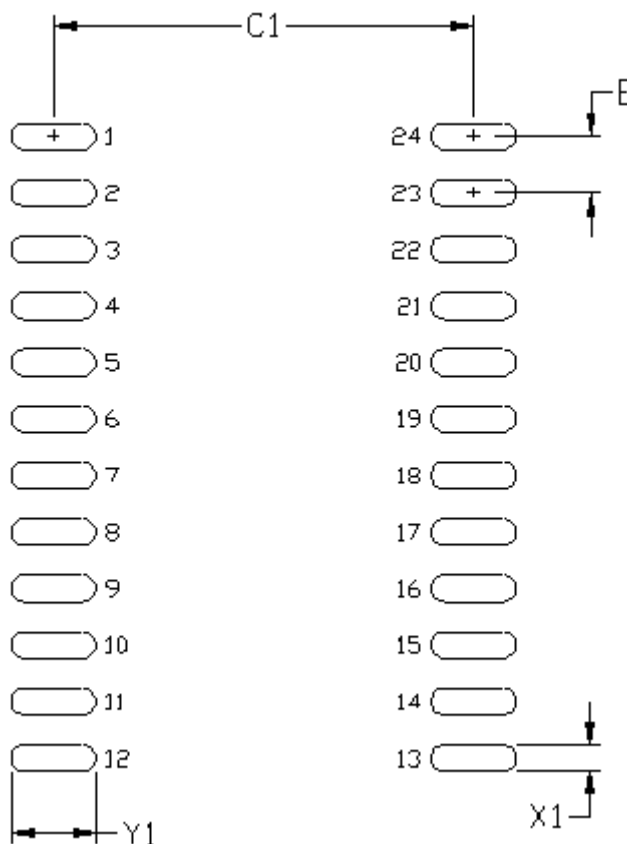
PCB Land Pattern: 24-Pin Wide Body SOIC
